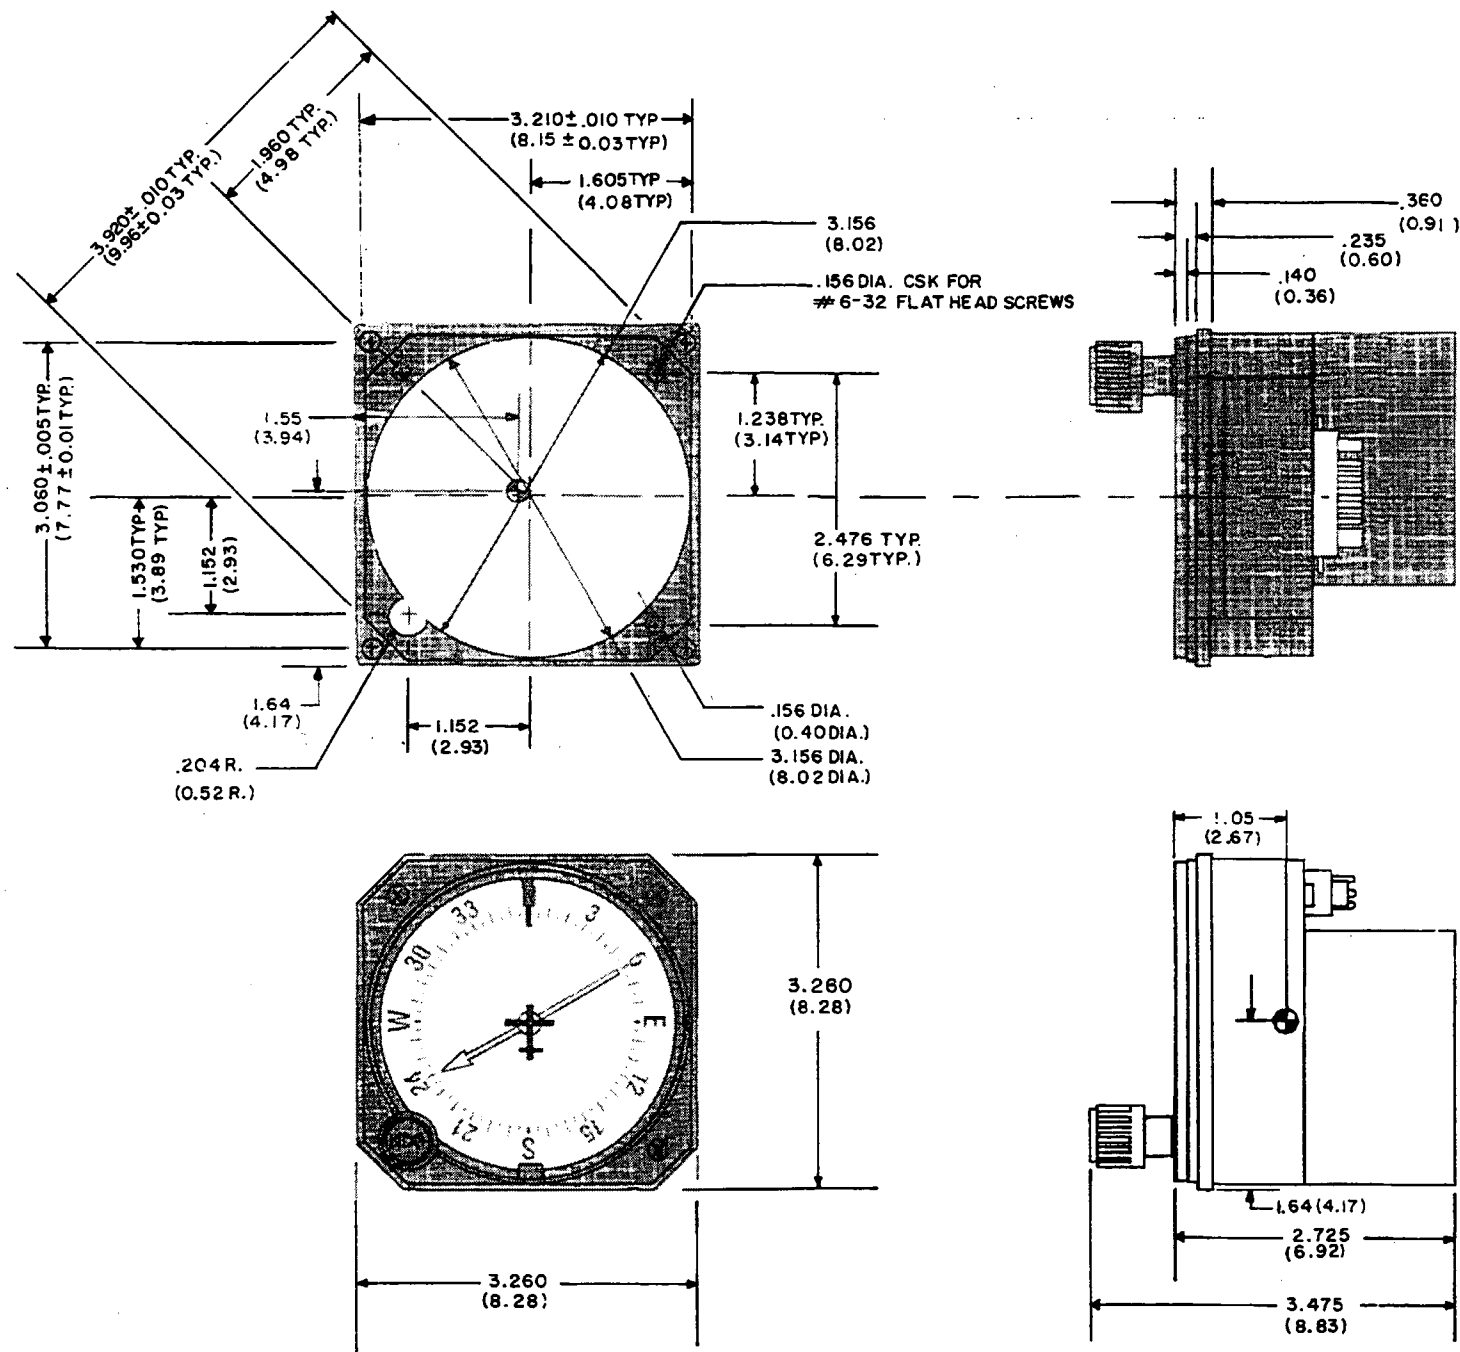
KR 87 RECEIVER INSTALLATION DRAWING
